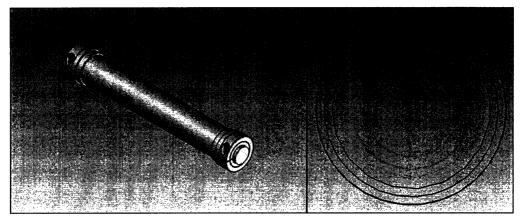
Left: solid model of the modified roller using 1 ¹/₄" diameter 6061 Aluminum rod, flange ball bearings and shaft collars; Right: cross-section of roller.
